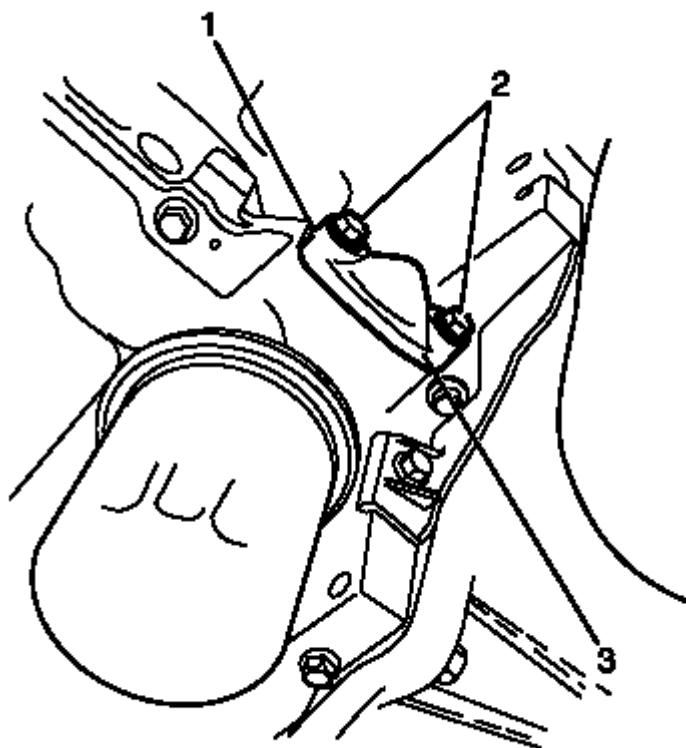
Identifying Oil Pan Cover To Oil Pan Retaining Bolts
